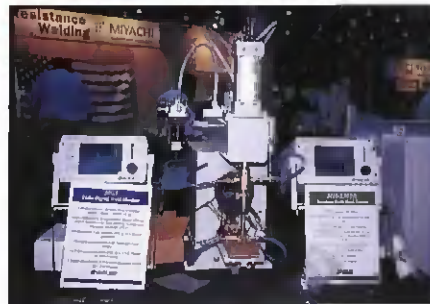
This series of compact, color, digital weld monitors can be used to help set up the welding machine and weld process, troubleshoot problems, and validate the welding process.
